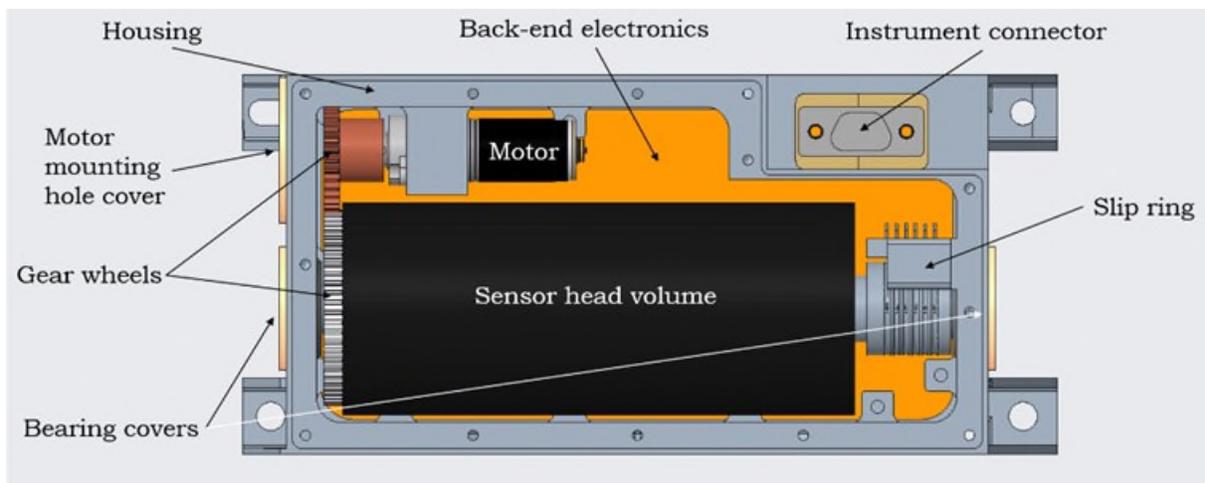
Working principle of the GRASS mechanism prototype, forming the basis of the here presented mechanism. Figure from [9].
